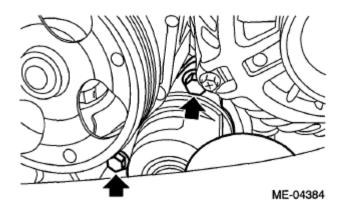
Locating V-belt Tensioner Assembly Courtesy of SUBARU OF AMERICA, INC.
